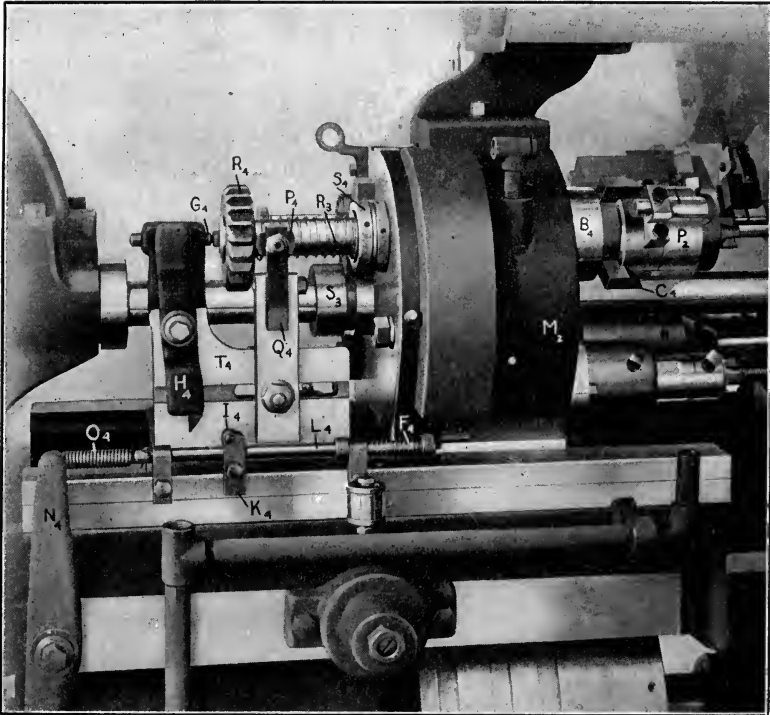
View of the Main Tool-head, showing the Right-hand Threading Mechanism
